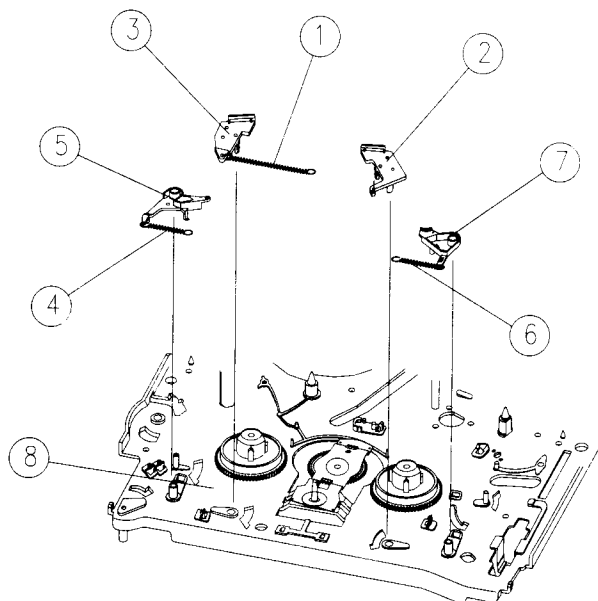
S/T MAIN & SUB BRAKES REMOVAL
